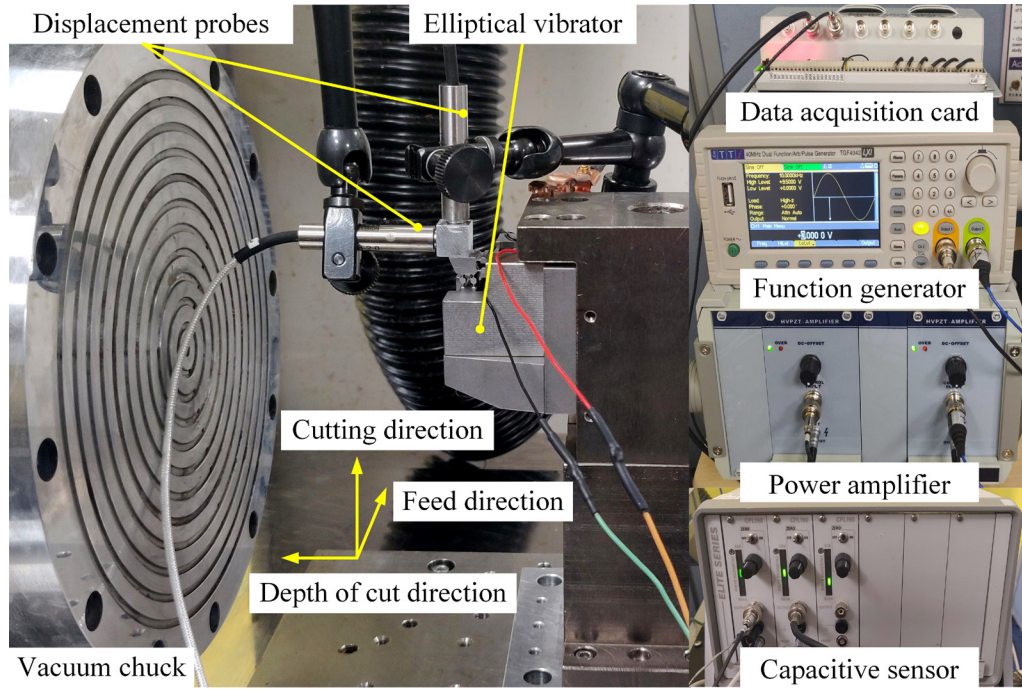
Prototype assembly of the designed elliptical vibrator.
